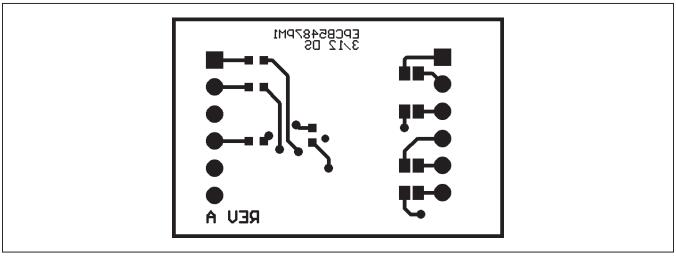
MAX5487PMB1 Peripheral Module PCB Layout—Solder Side
